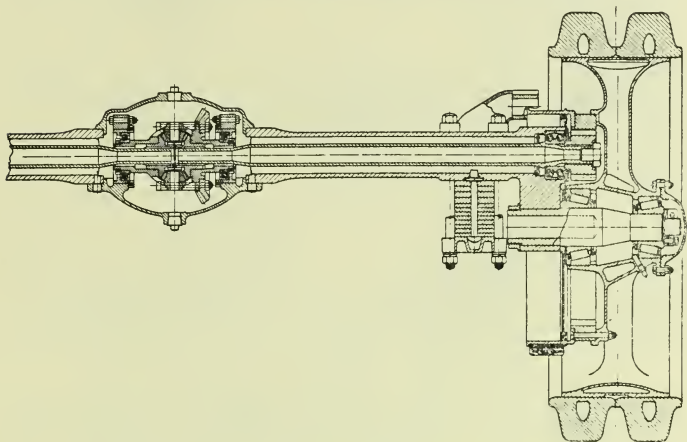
SECTIONAL DRAWING OF THE TYPE-L AXLE
